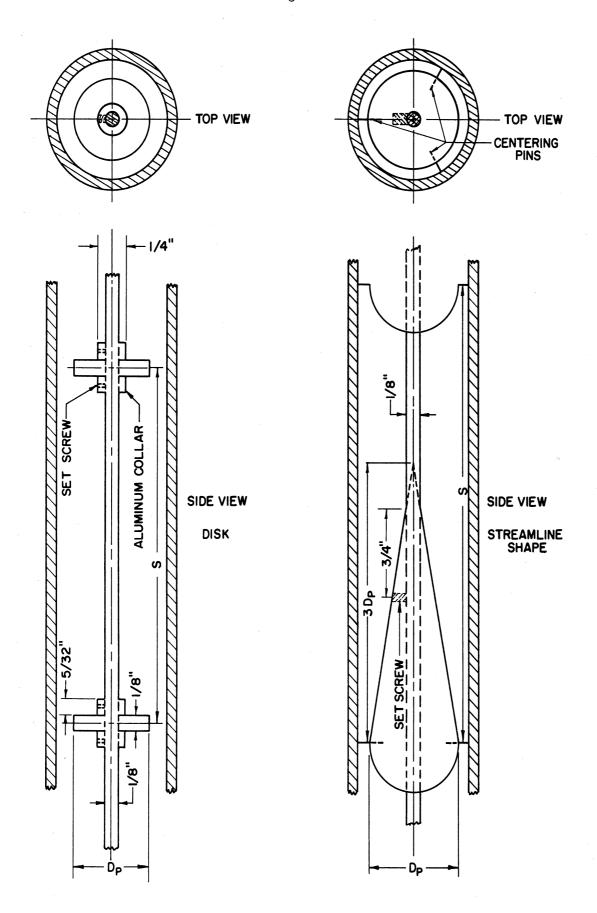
Diagram of Disk and Streamline Shape Showing Relative Dimensions and Method of Mounting.
